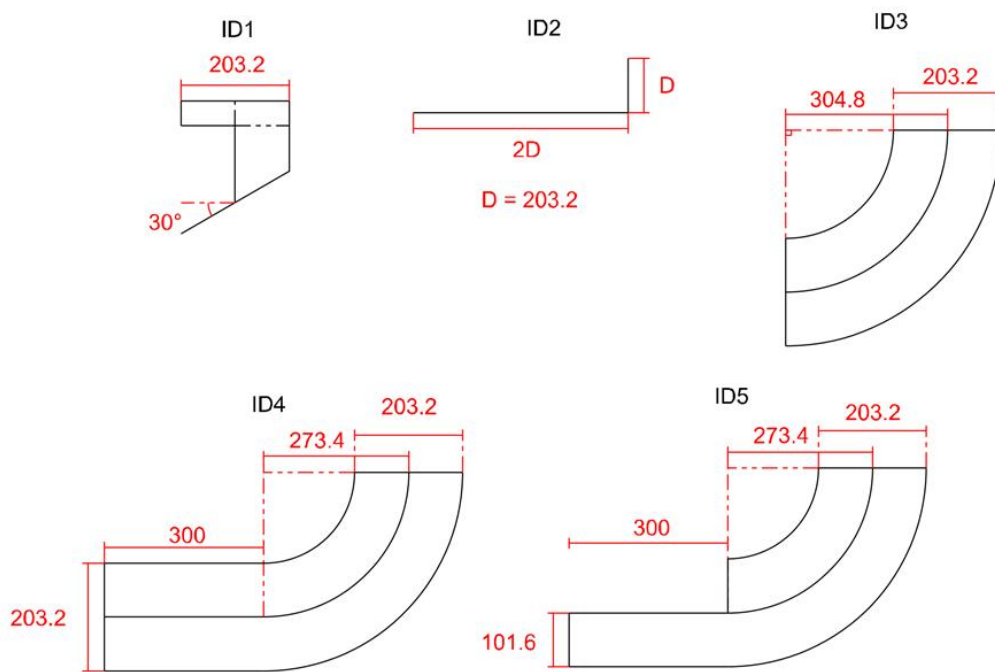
Dimensions of the tested inlet distributors, the measures are in mm.
